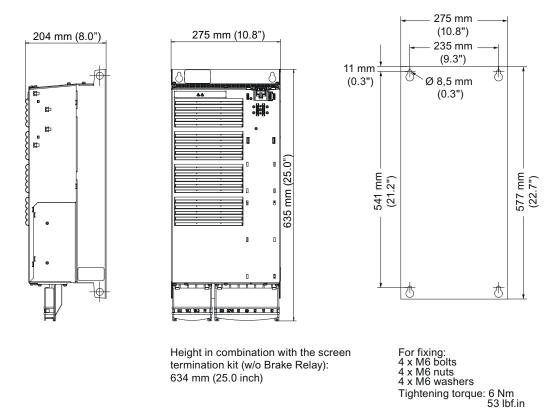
Dimensions and drill pattern for Power Module PM240, FSE, IP20, with integrated filter class a
